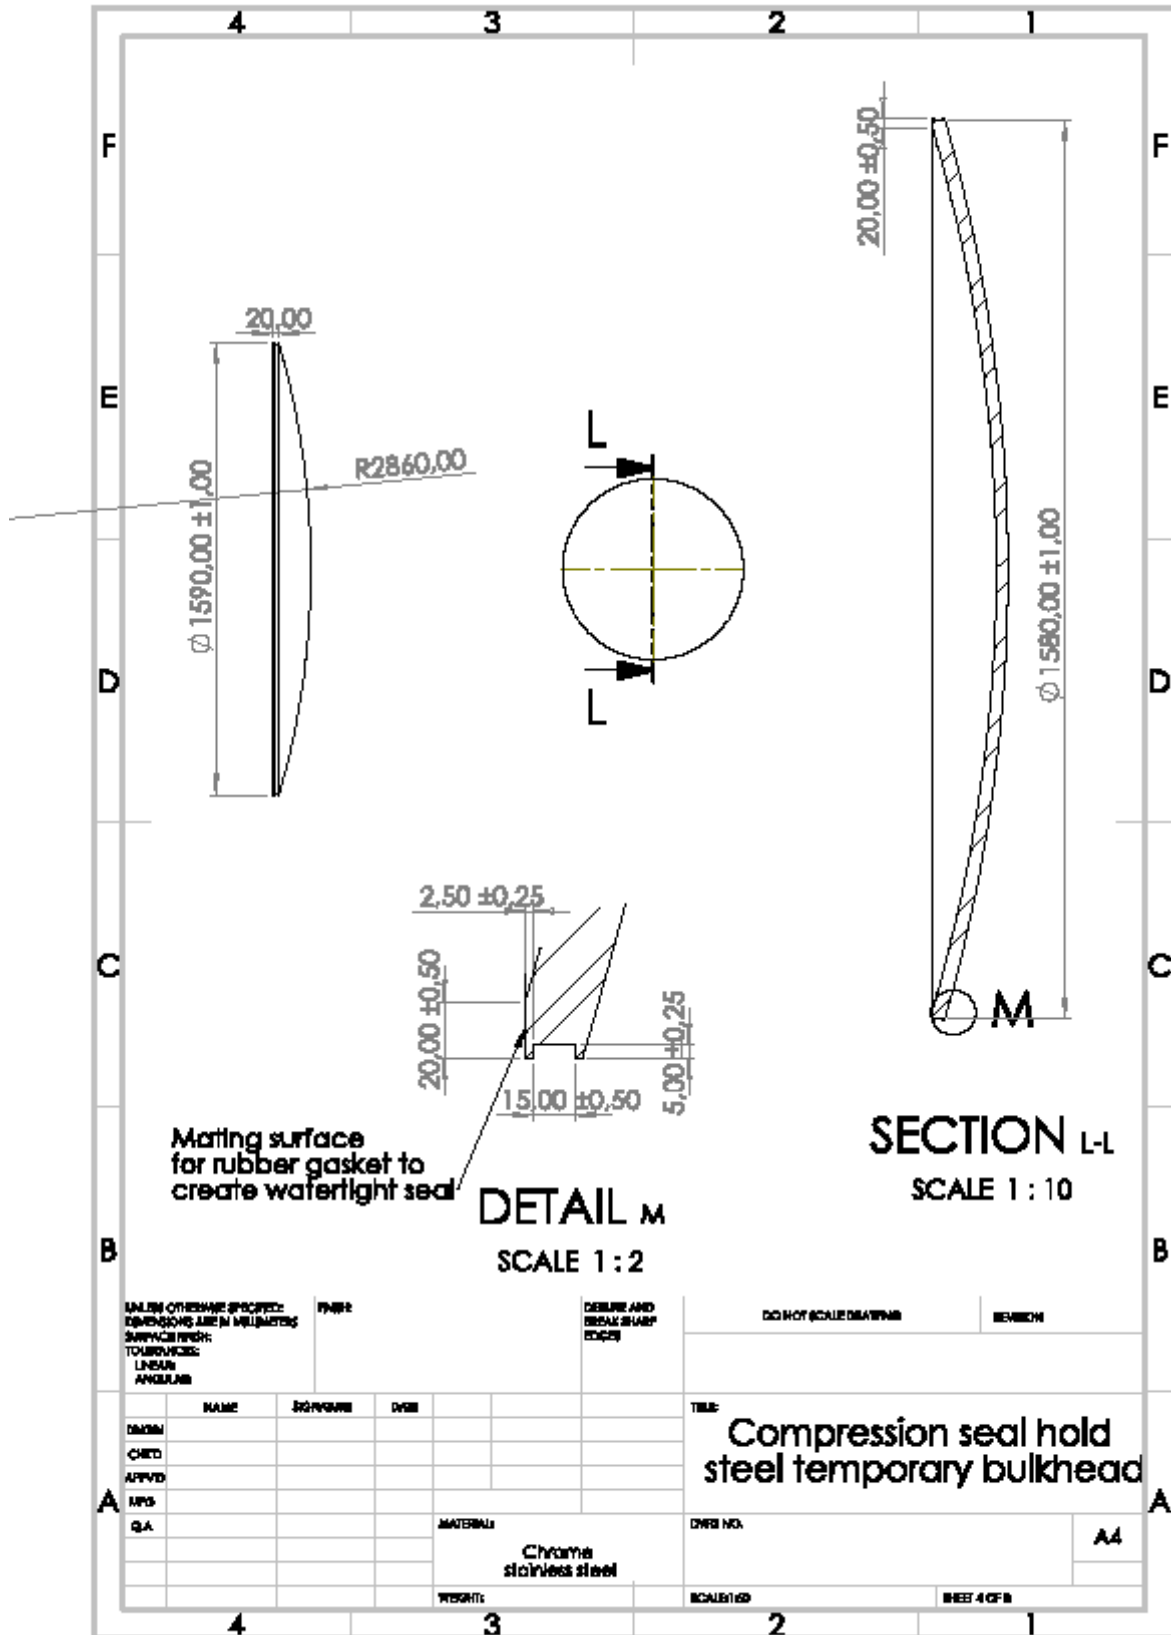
2D technical drawing of the water passage compression seal temporary steel bulkhead
